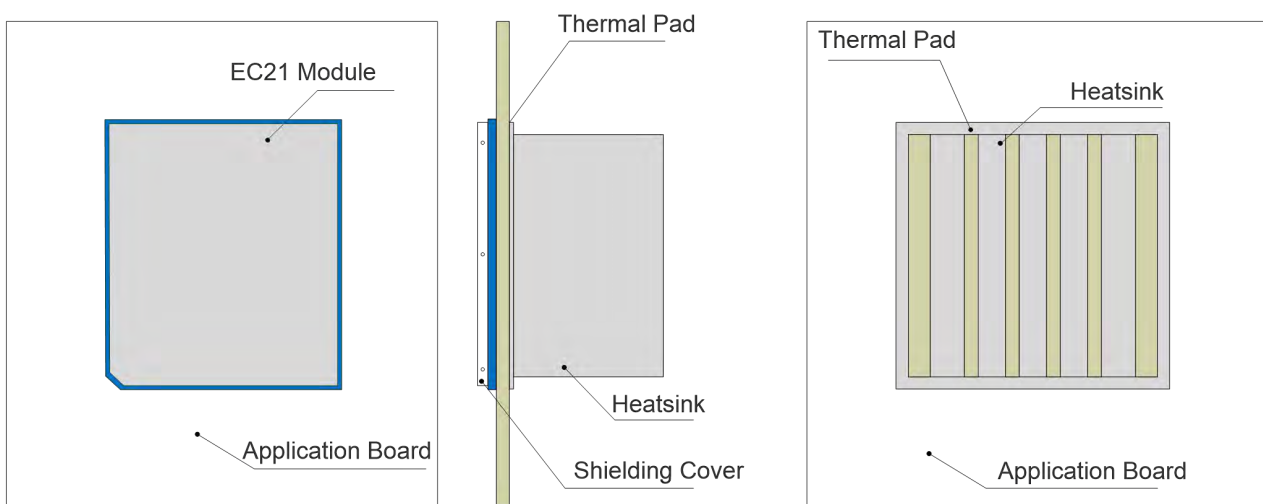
Referenced Heatsink Design (Heatsink at the Bottom of Customers' PCB)
